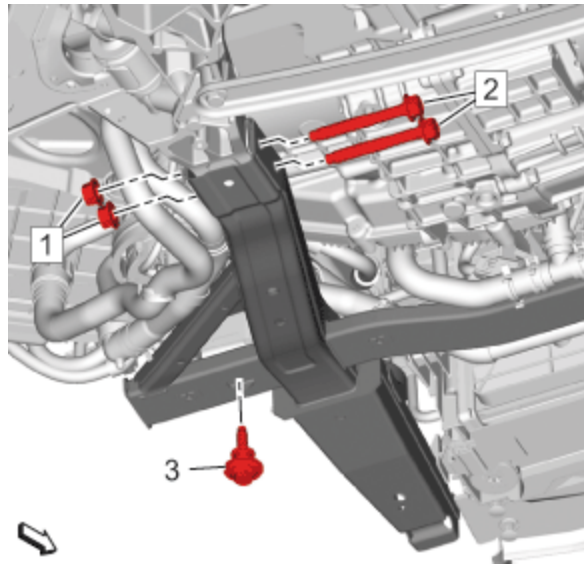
Drivetrain And Front Suspension Crossmember Extension Fasteners
